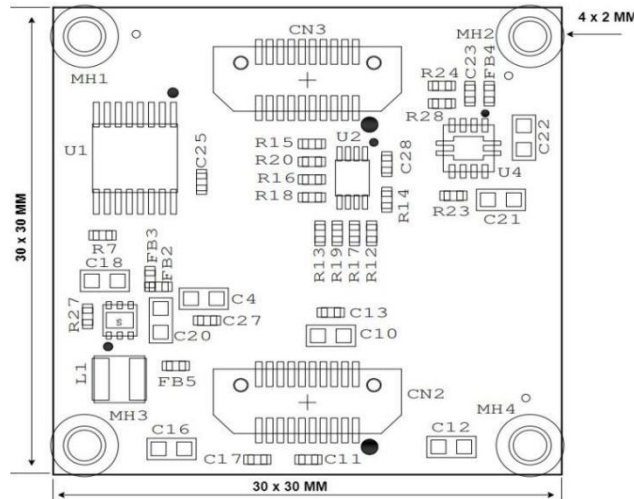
Front View of e-CAM50_CUIMX8_H01R2 Camera Adaptor Board Mechanical Dimensions
